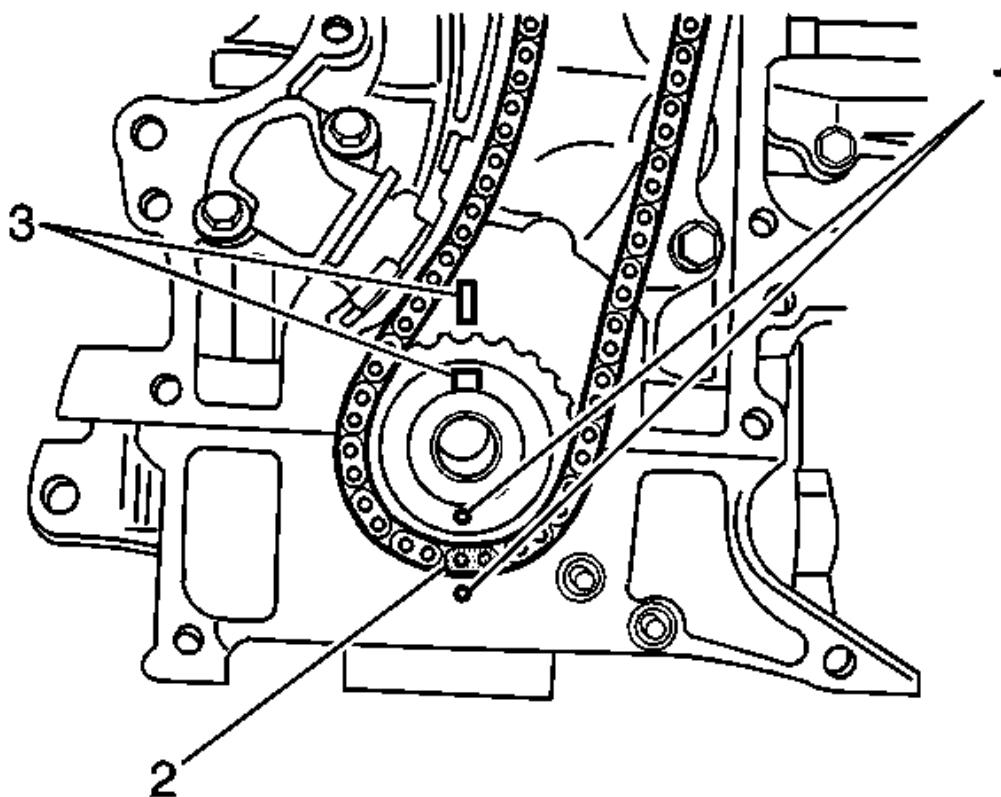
View Of Engine Block, Timing Chain & Crankshaft Timing Mark
